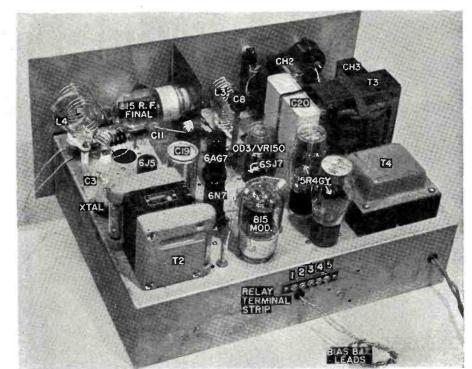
Top-rear view of transmitter shows proper placement of component parts.
